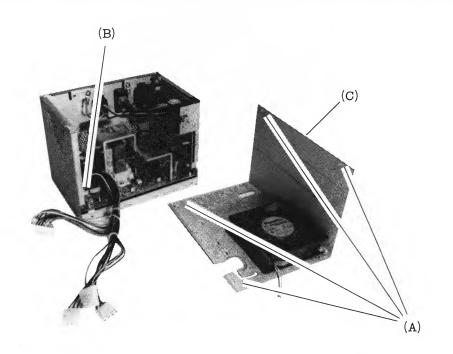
COVER REMOVAL/REPLACEMENT
